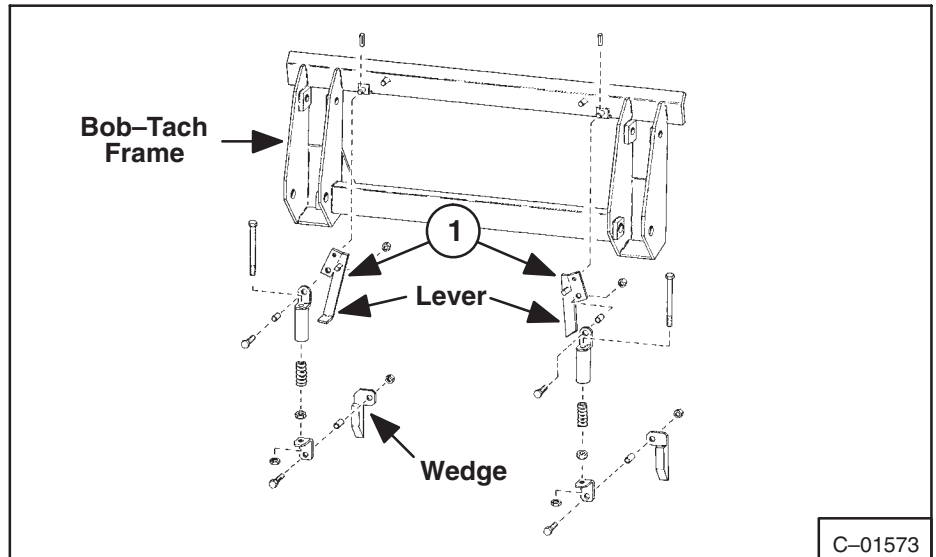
Bob-Tach Breakdown (Early Models)
